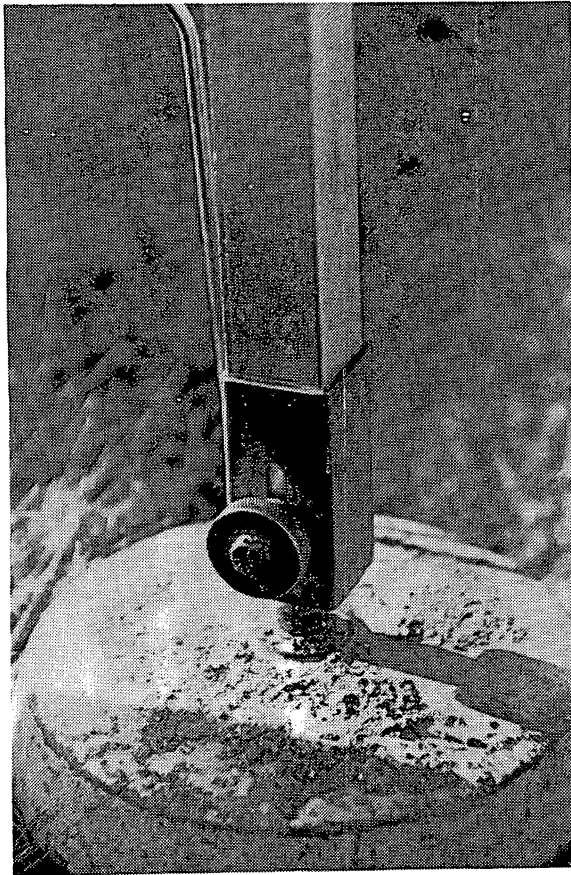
Movable sleeve for preventing the rod from slipping off the turning point.
